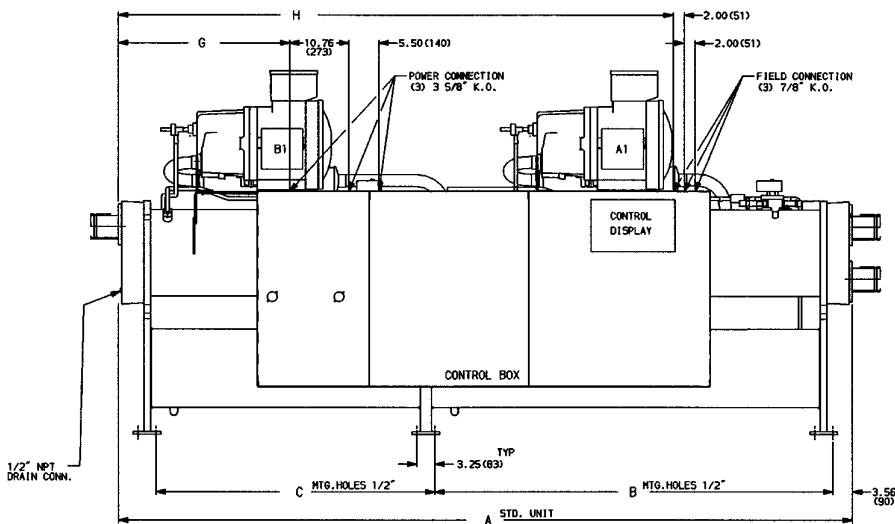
Base Unit Dimensions, 30HXC161-186 Units
